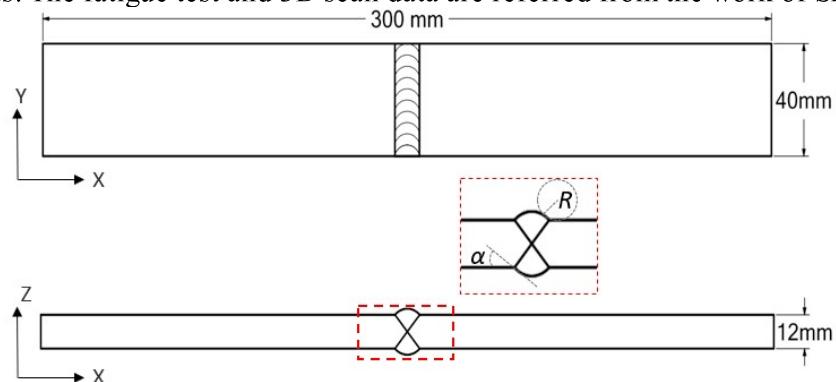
Geometry of butt-welded joint used in fatigue testing (a) top view, (b) profile view.
